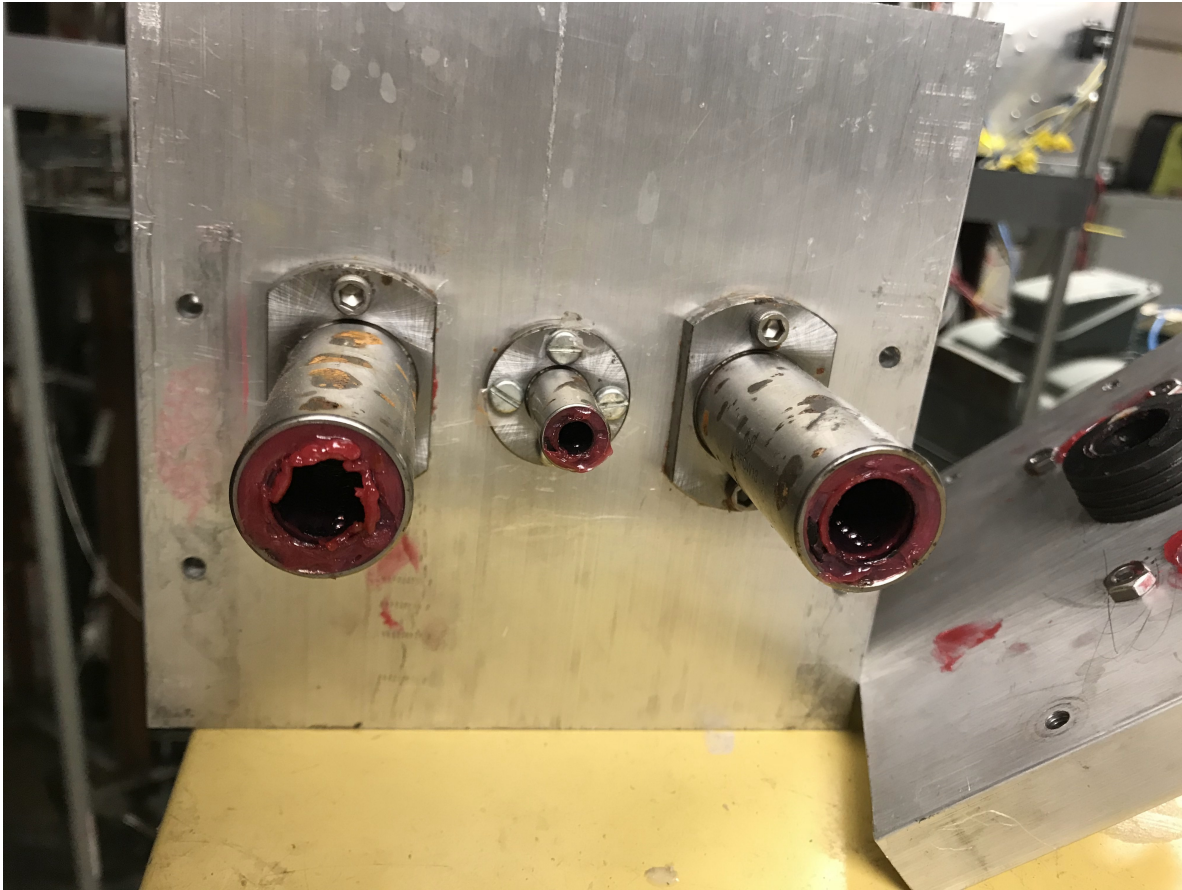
The manufactured end plate with purchased linear bearings attached
